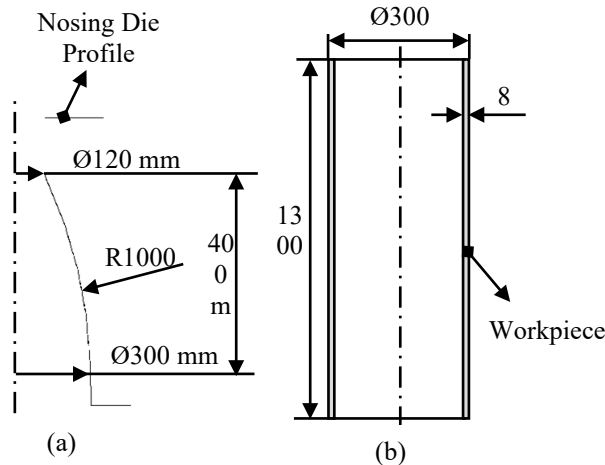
a) Basic dimensions of the die, b) Basic dimensions of the workpiece
